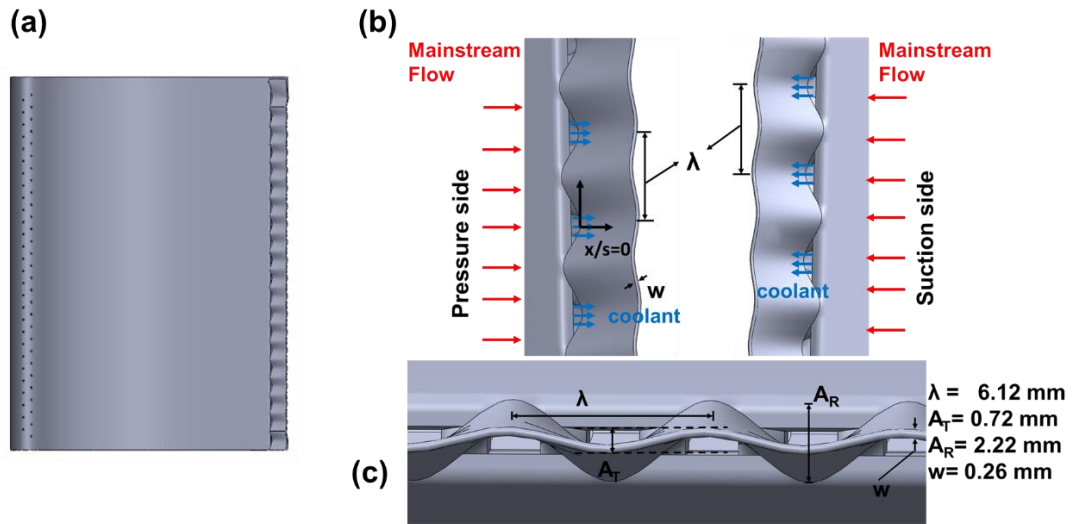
(a) Wavy Design view from pressure side, (b) (c) definitions and dimensions of the wavy structure
